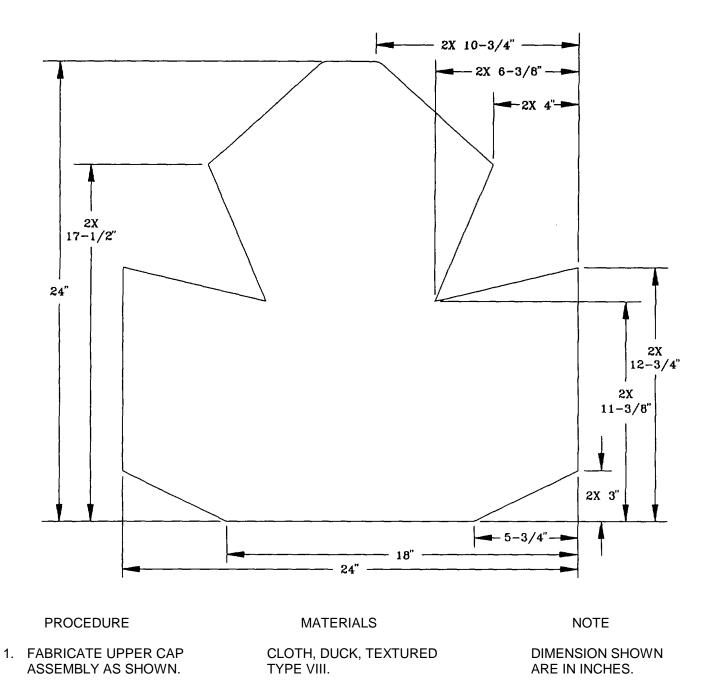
(Container Side Mounted) Upper Cap Assembly (Sheet 1 of 2)
